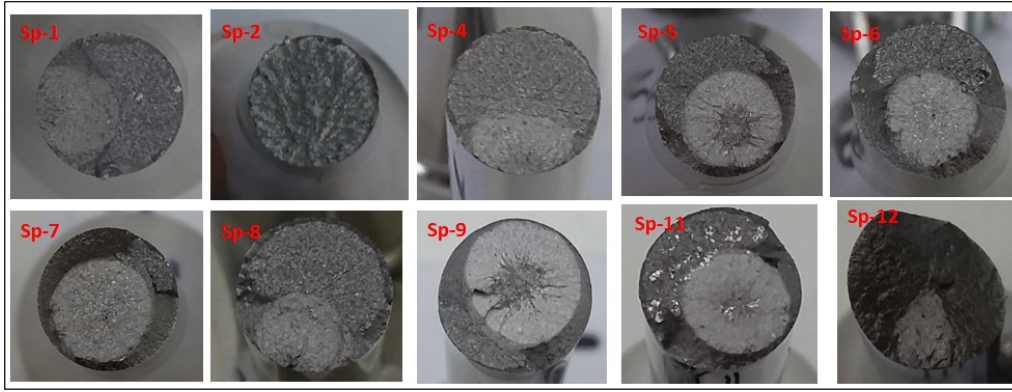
Optical image for fracture surface of group -2 failed specimens.
